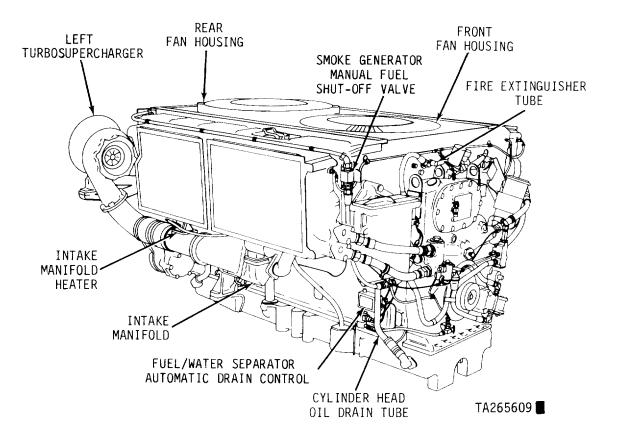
AVDS-1790-2DR engine assembly - left front view.
